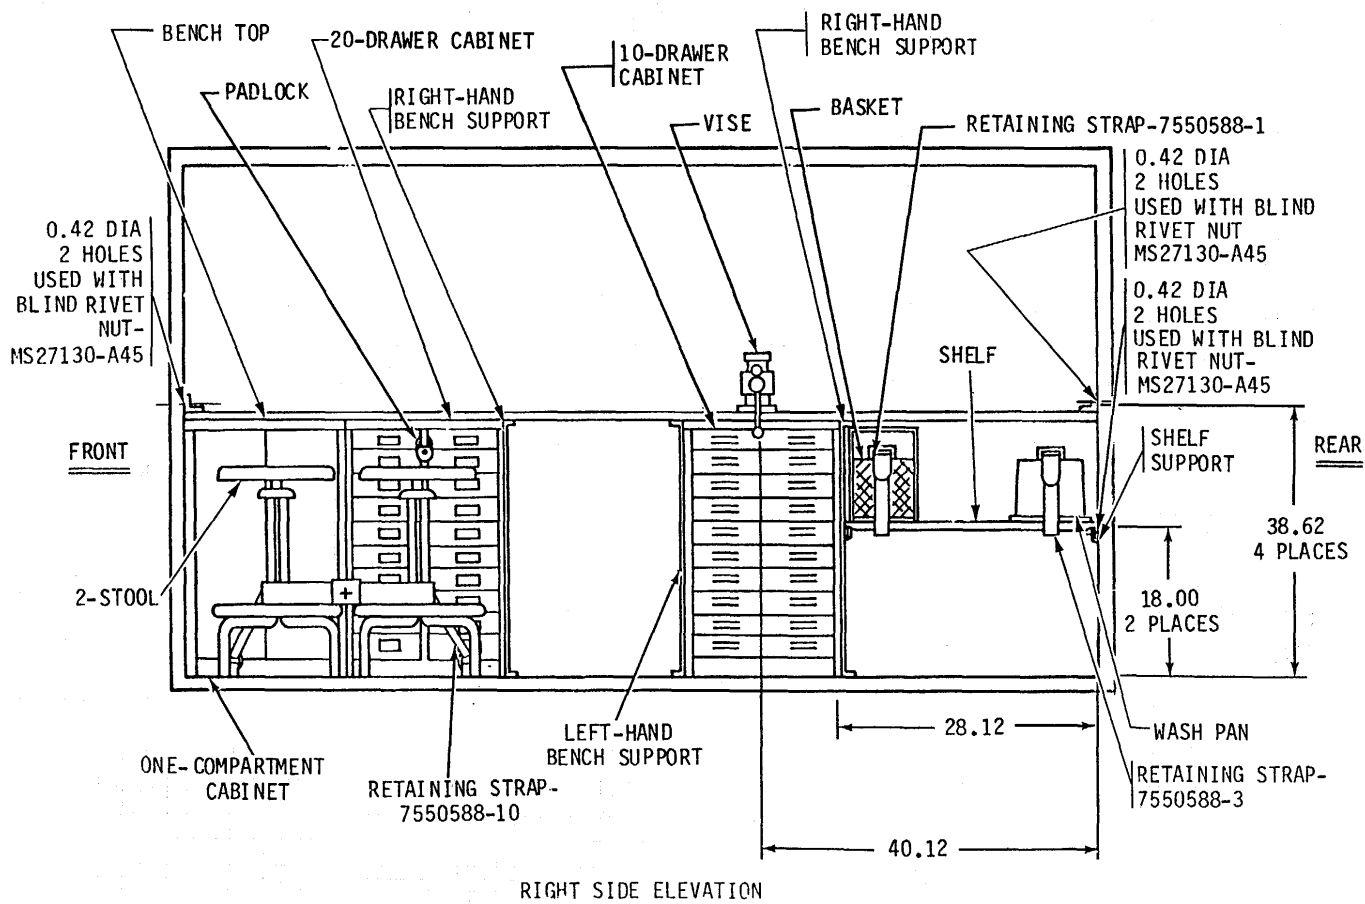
Components to be Mounted, Unit 1, 280, Right Side Elevation.
